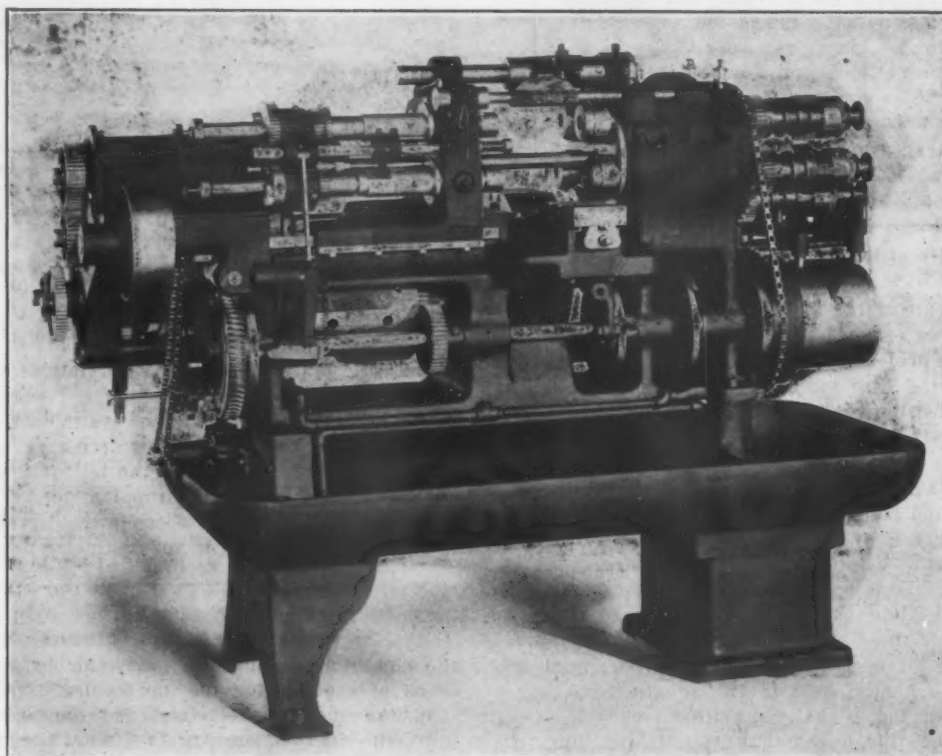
A Rear View of the Peerless Automatic Screw Machine.
